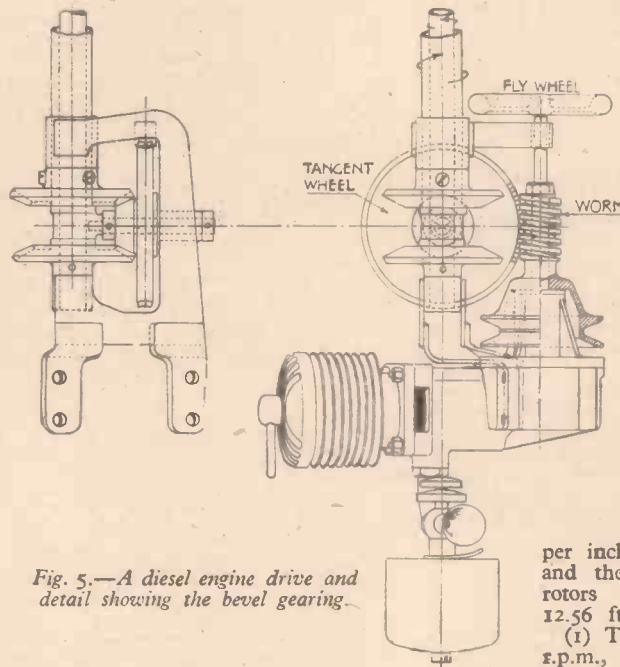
A diesel engine drive and detail showing the bevel gearing.
